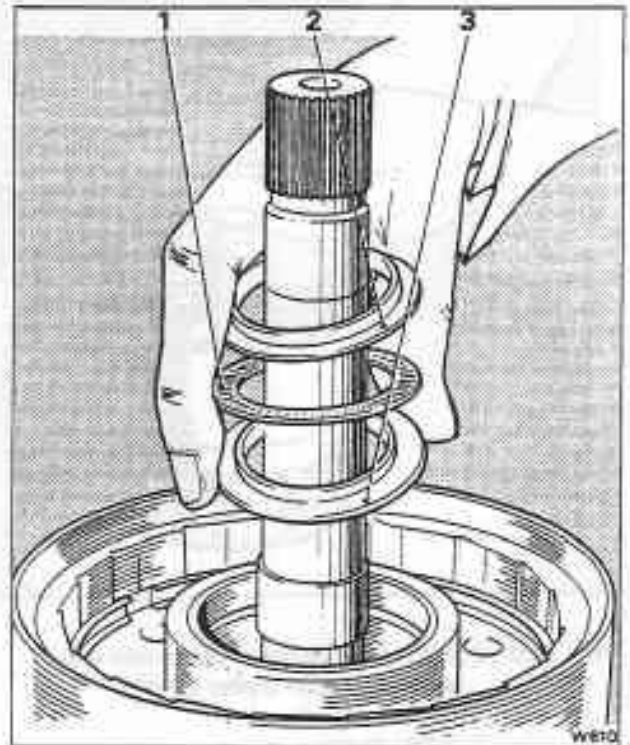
Fitting the races and thrust bearing to the sun gear
